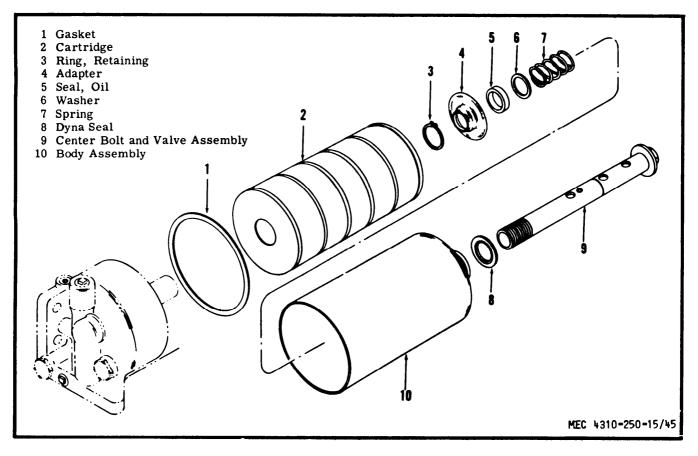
Engine Oil Filter, Disassembly and Reassembly.
